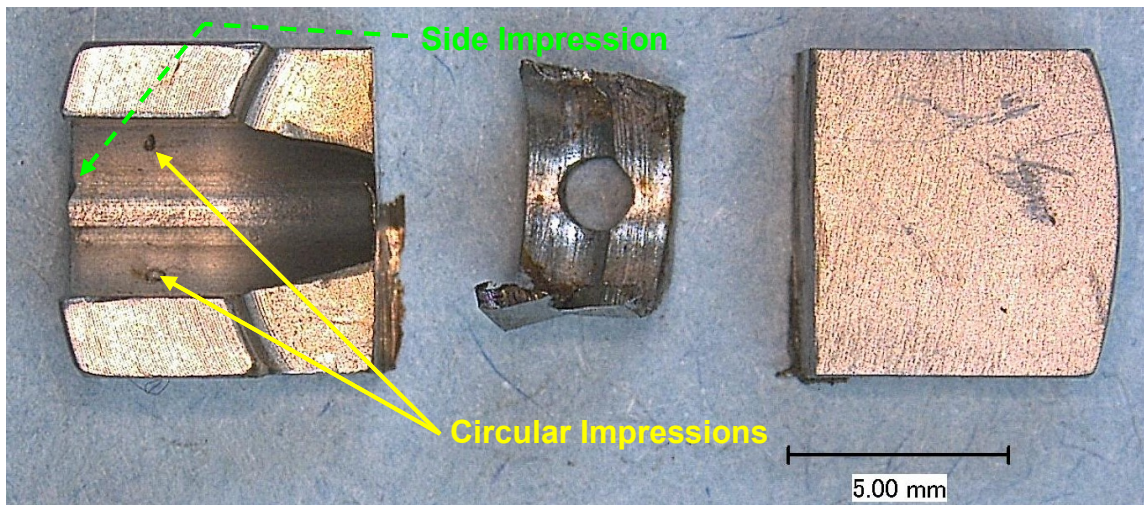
Remnants of the lever arm, as positioned facing outside the stepper motor.
